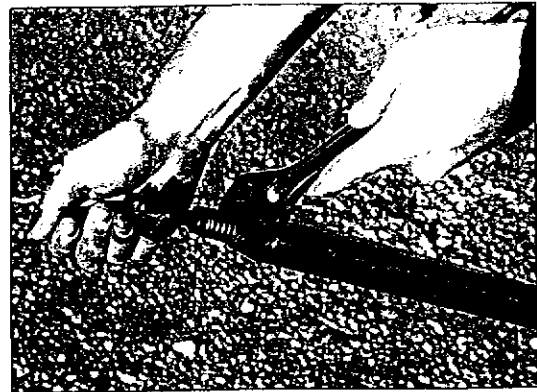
Securely tighten the Piston Stop-Pin in the Large Bore Drive Head.
